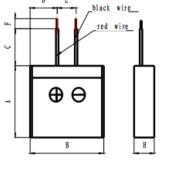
Solar Panel Technical Drawing (Units in mm) [11]
